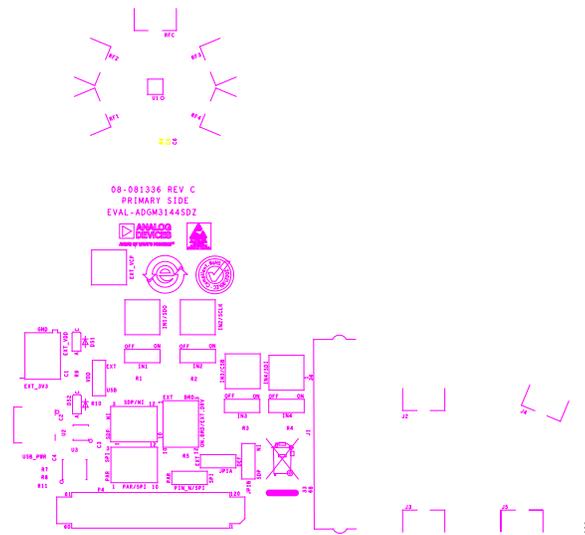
EVAL-ADGM3144SDZ Component Side Silkscreen PCB Drawing (Top)
